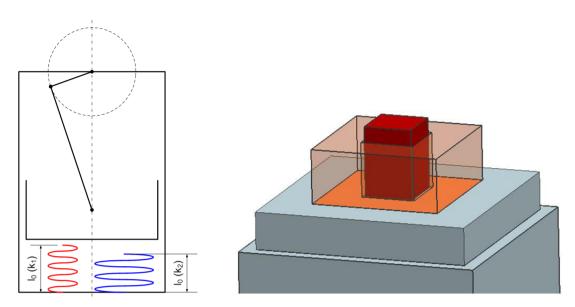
(a) Inserting forming forces to the press by two springs; (b) Replacement of the forged piece by two unequal height pieces of elastic material.
